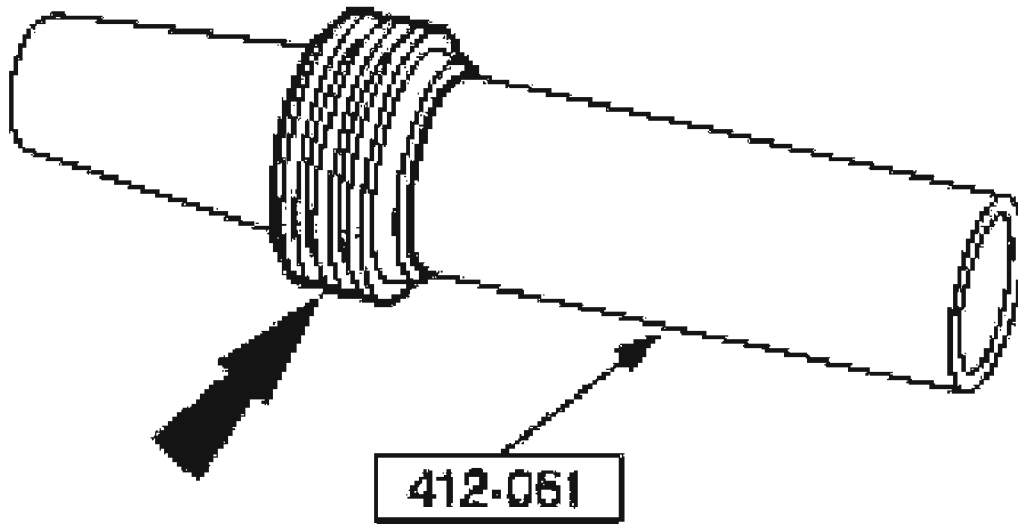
Removing Shaft Seal From A/C Compressor
